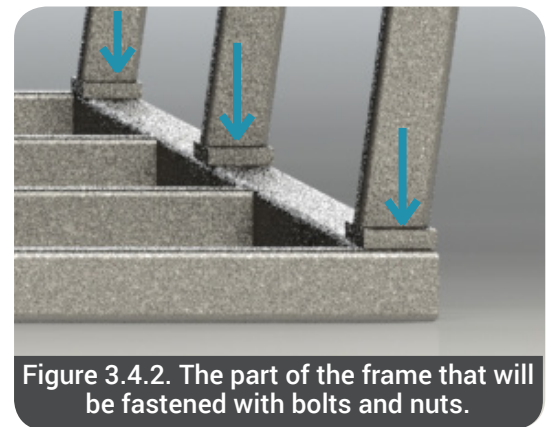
The part of the frame that will be fastened with bolts and nuts.
